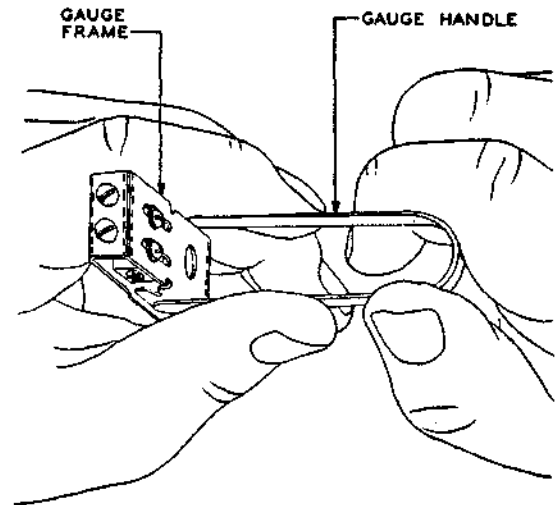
Method of Adjusting Clearance Between Reed and Gauge Handle
